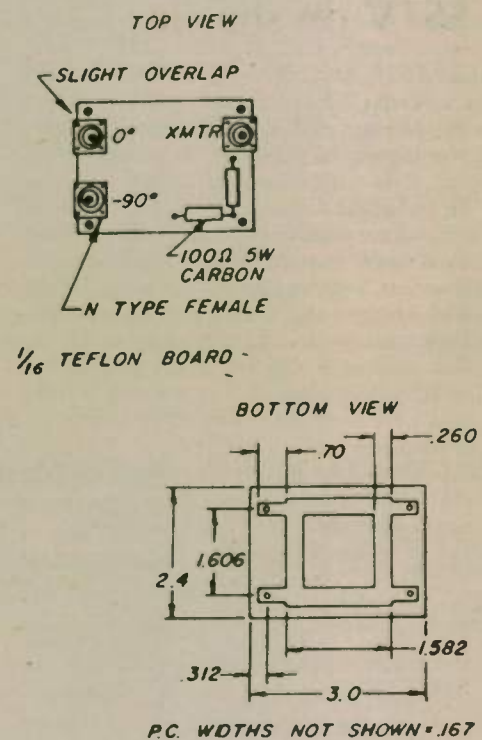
1270 MHz quad hybrid; dimensions in inches
